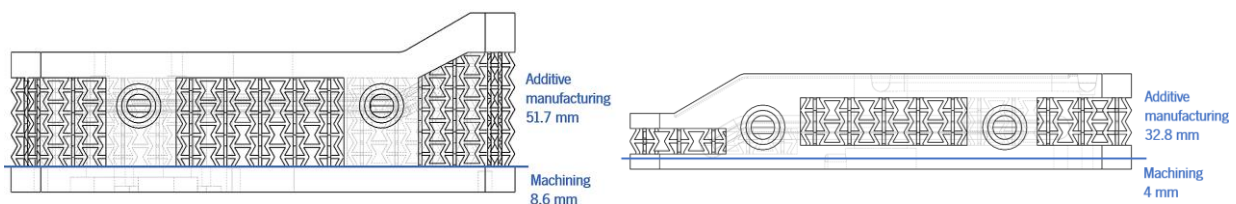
Hypothesis of hybrid manufacturing to produce injection moulding inserts.
